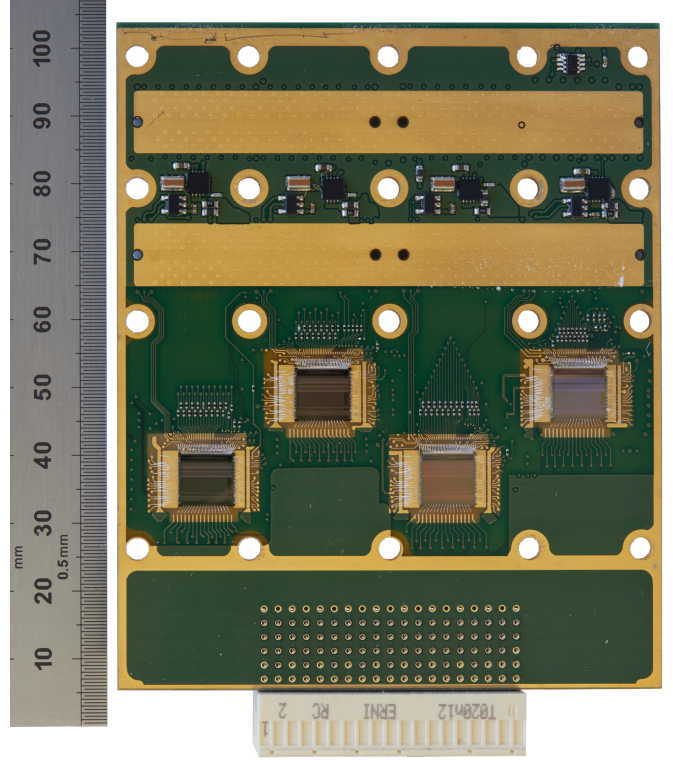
Photograph of the FEE mezzanine board. The four ASIC chips that are wire bonded to the board are visible in the lower half. 95-pin ERNI connector [24] shown at the bottom. Connectors to the FEE64 PCB not shown (reverse side of ASIC PCB).
